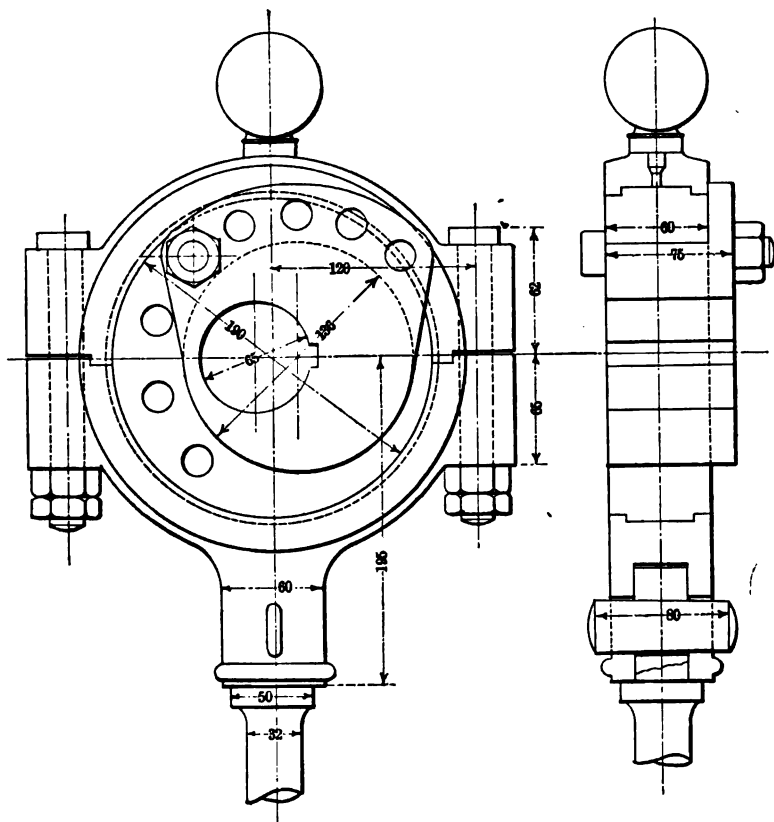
ECCENTRIC OF HYDRAULIC JIG.
